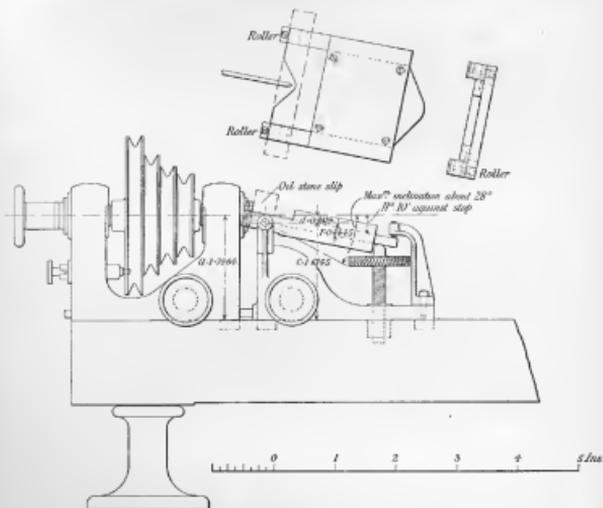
Rocher sharpening appliance for the cutters used on the punch-cutting machine.
